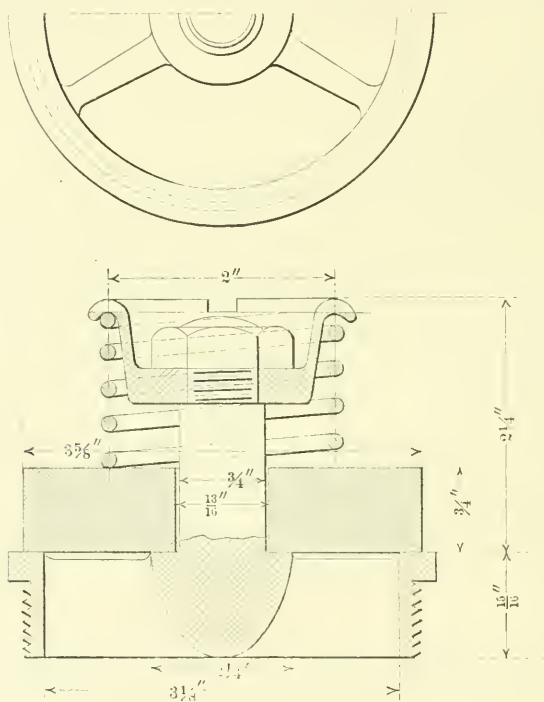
SECTION OF A STANDARD MAKE OF PUMP VALVE
